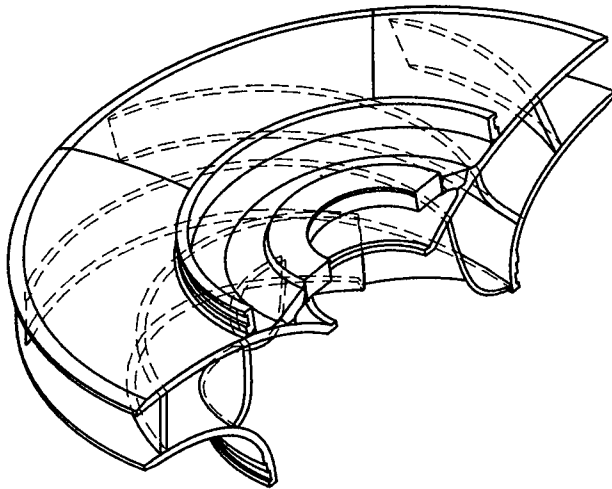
Sectionalized Runner Illustrating Weld Joint Locations
